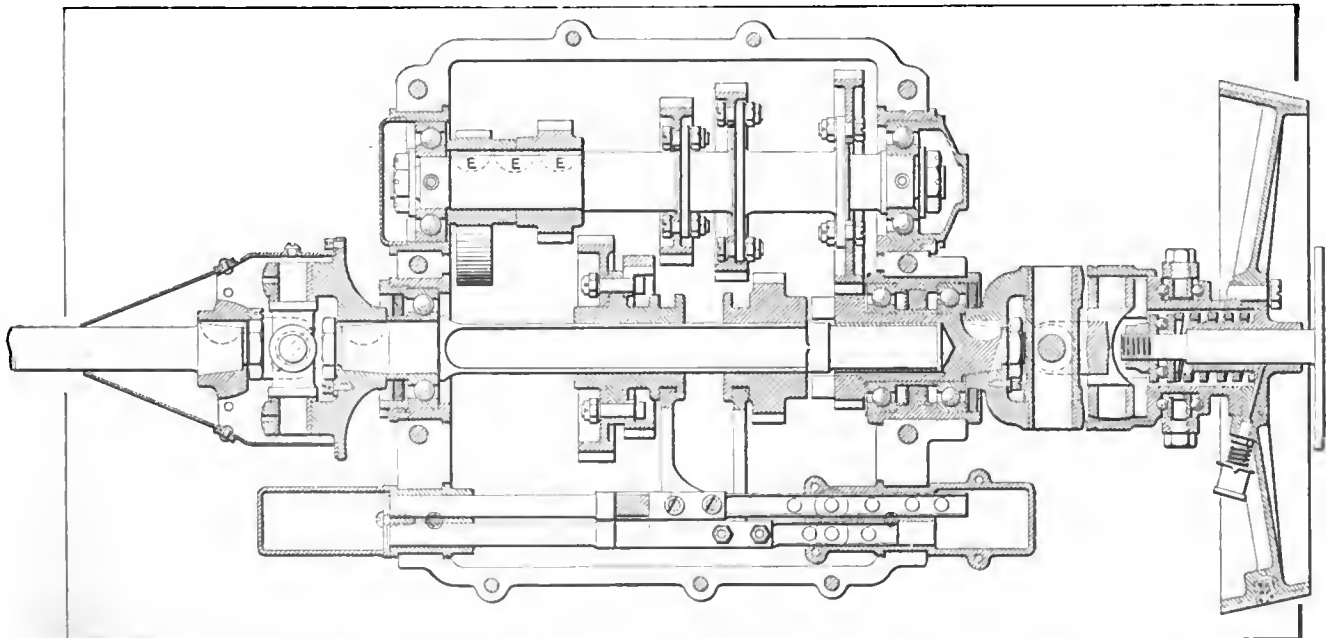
Pierce-Arrow transmission gear and clutch assembly, with pressed steel housings over joints
